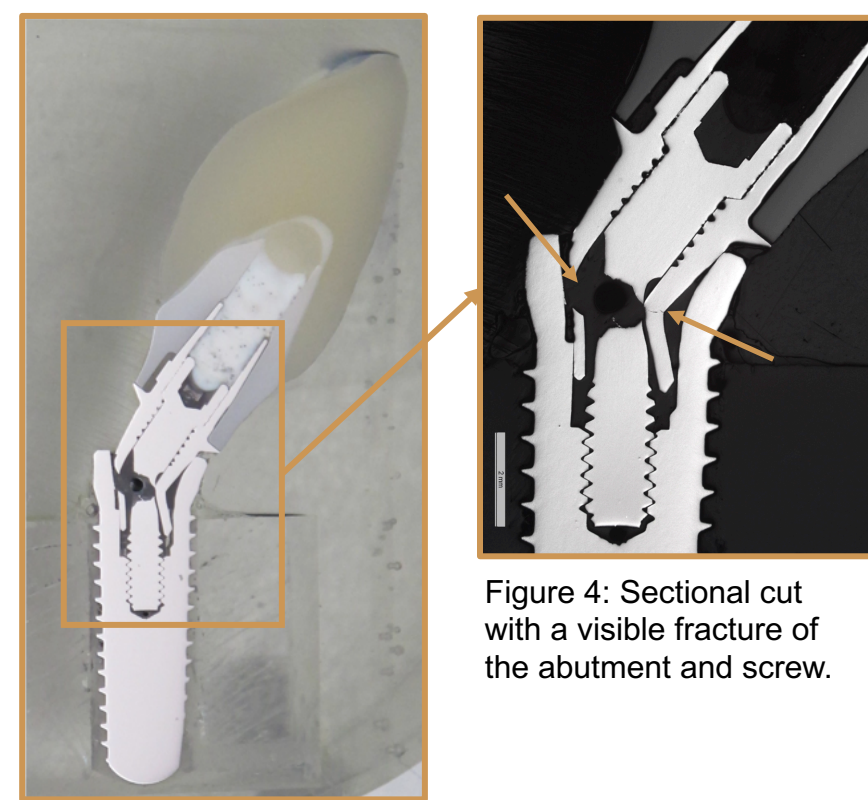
Sectional cut with a visible fracture of the abutment and screw.
